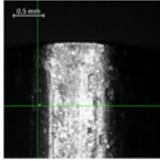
WP2 Gear Shaft B, Gear B 26 Gears produced (Material removed: 84.69 in³) Tooth 1—Tip (left) Face (right).
